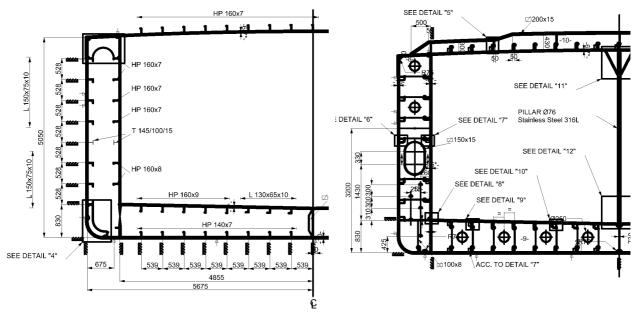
Structural drawings of a stainless steel tanker. Drawings courtesy of Mercurius Shipping Group
